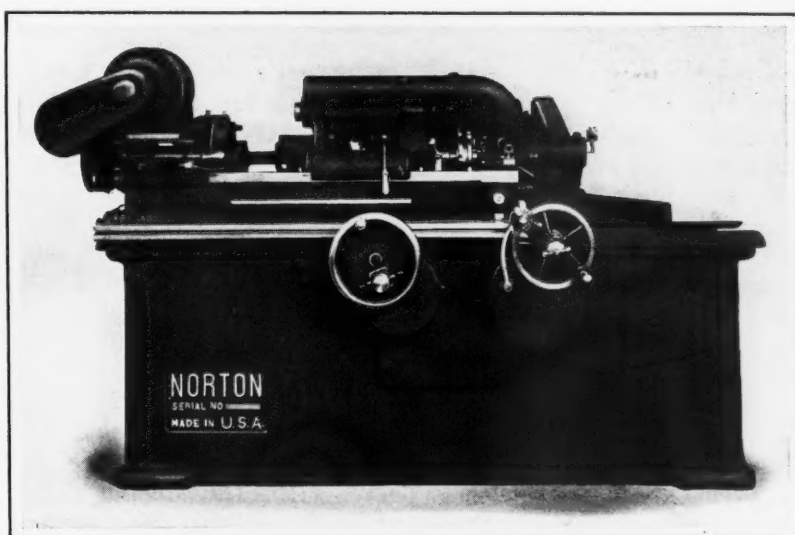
Norton Grinding Machine Arranged for Grinding the Cams of Radial-type Airplane Engines
